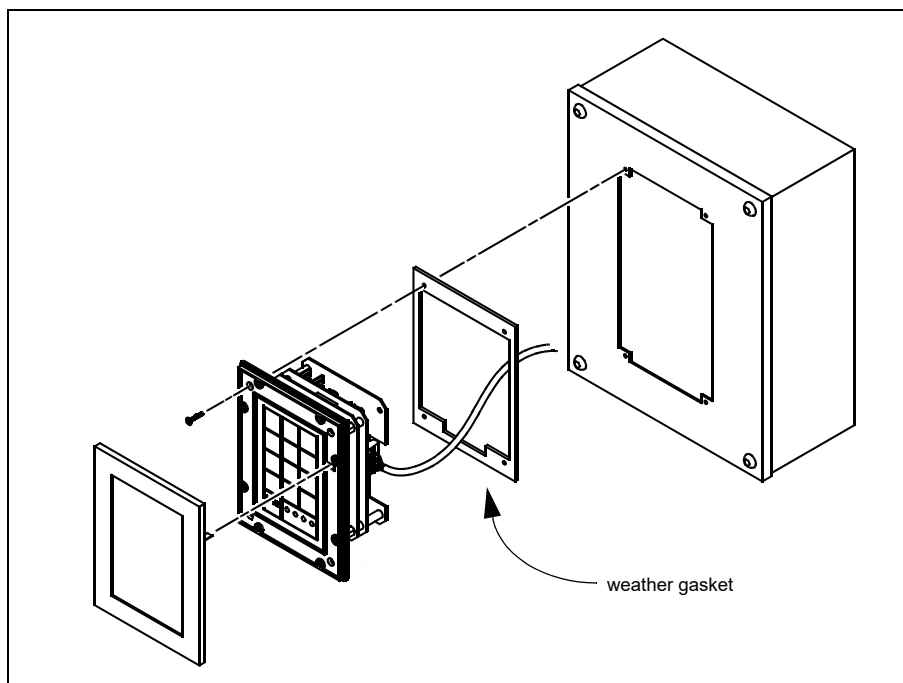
Mounting the ScramblePad with Weather Gasket
